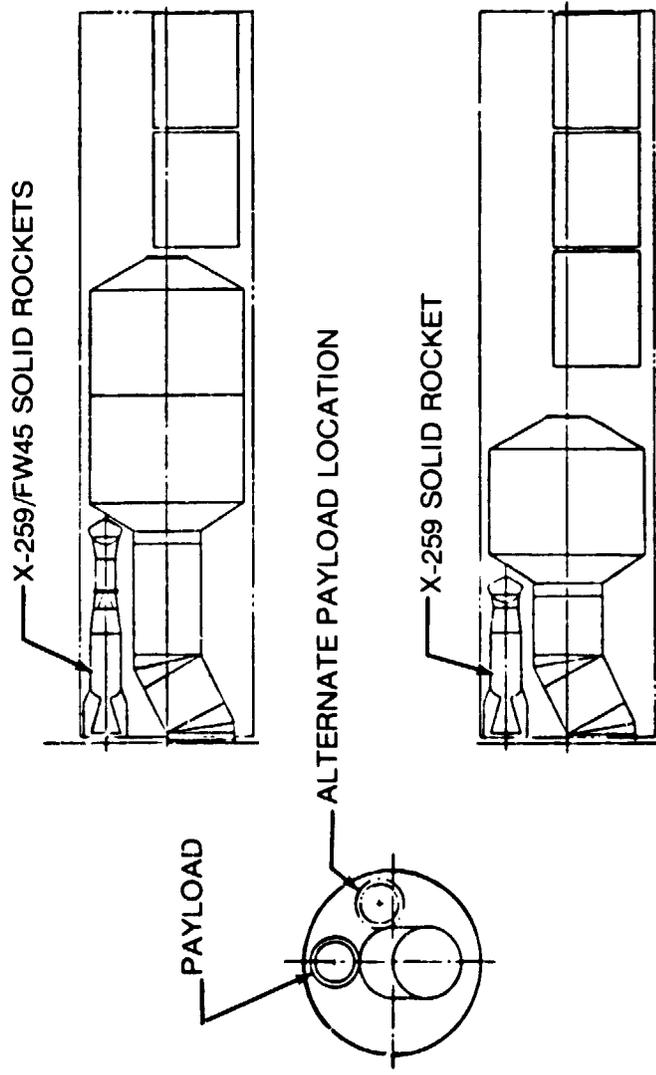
TYPICAL PIGGY-BACK PAYLOAD INSTALLATION
